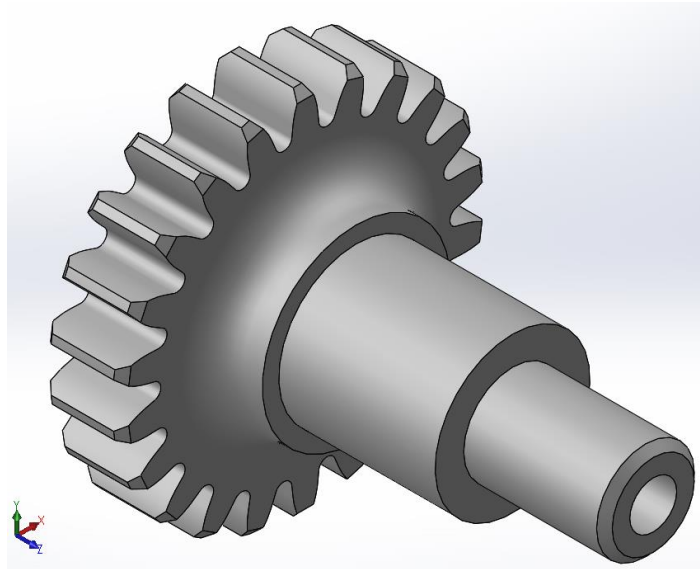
CAD drawing of the coupling wheel between the encoder and the rotating solar B
